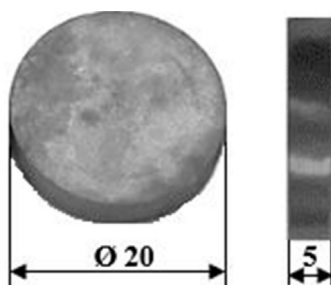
Digital image of the sintered specimen (unit of measurement is mm)
